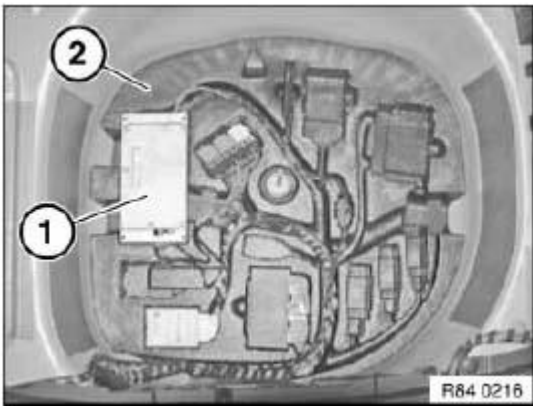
Identifying Hands-Free Charging Electronics And Device Mounting
